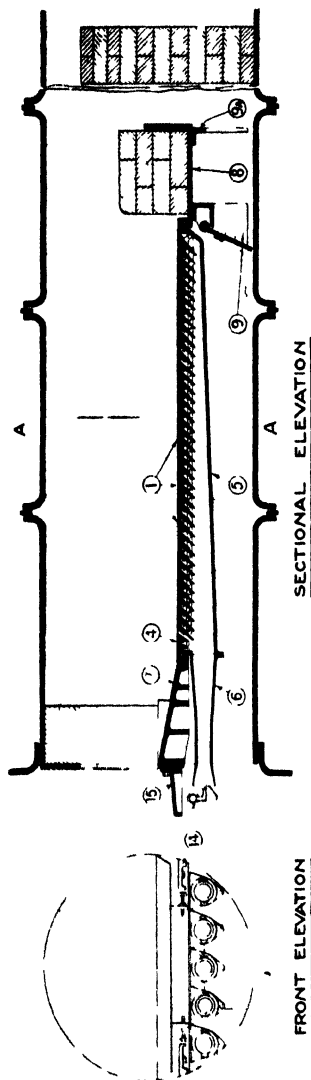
SECTIONS OF HEYWOOD FORCED DRAUGHT FURNACE
